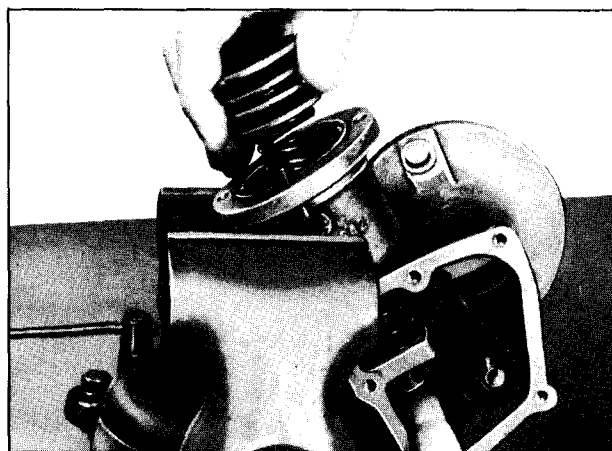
Removing or Installing Piston, Push Rod, and Spring
